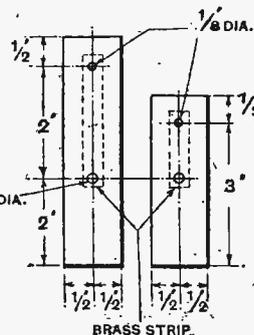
Ebonite supporting pieces and connection strips for the rotor.
